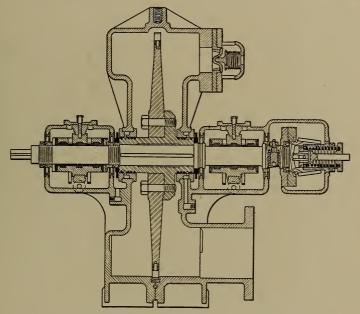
Sectional View of Westinghouse Re-Entry Type Impulse Turbine Courtesy of Westinghouse Machine Company, East Pittsburgh, Pennsylvania
